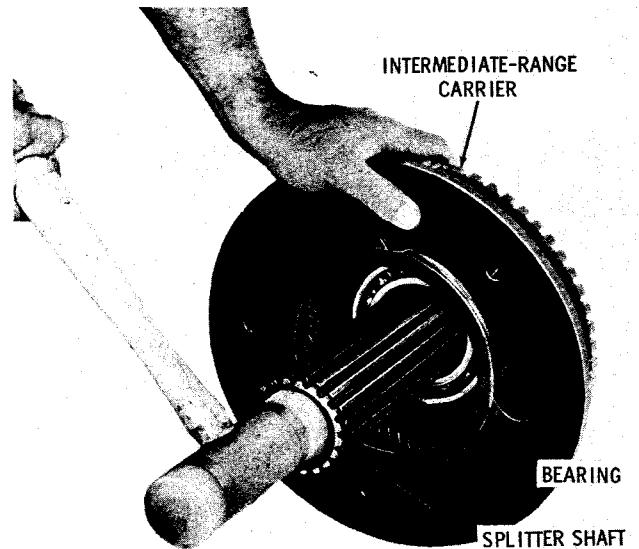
Removing splitter output shaft assembly from intermediate-range carrier
